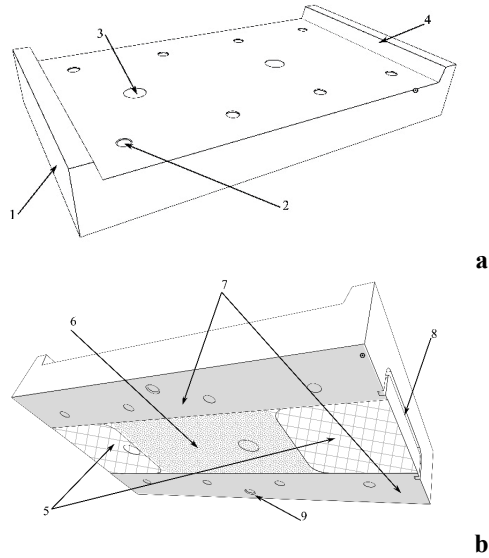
Aperture plate: top view (a) and bottom view (b). Here: 1- is a side flat surface, 2- holes for tightening bolts, 3- holes for pressure sensor, 4- flanges for tightening adjacent plates together with tie plates, 5- pockets of $500\mu\text{m}$ size, 6- aperture area, 7- flat surface area, 8- groove for O-ring seal, 9- holes for locating pins.
